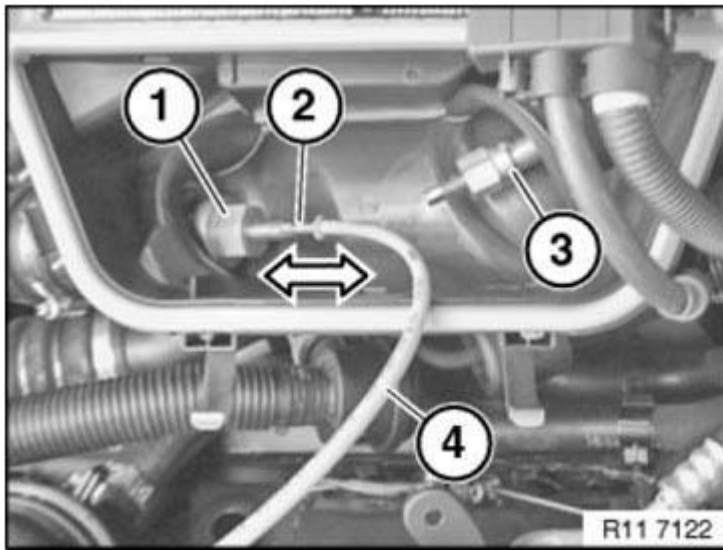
Inserting Blue Pneumatic Hose In Pneumatic Coupling Of Sealing Plug
